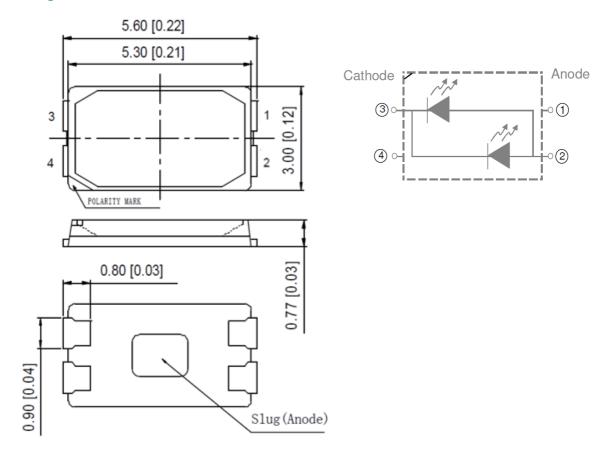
Mechanical drawings of the 5630 package, with unit in millimeter [in inches]
